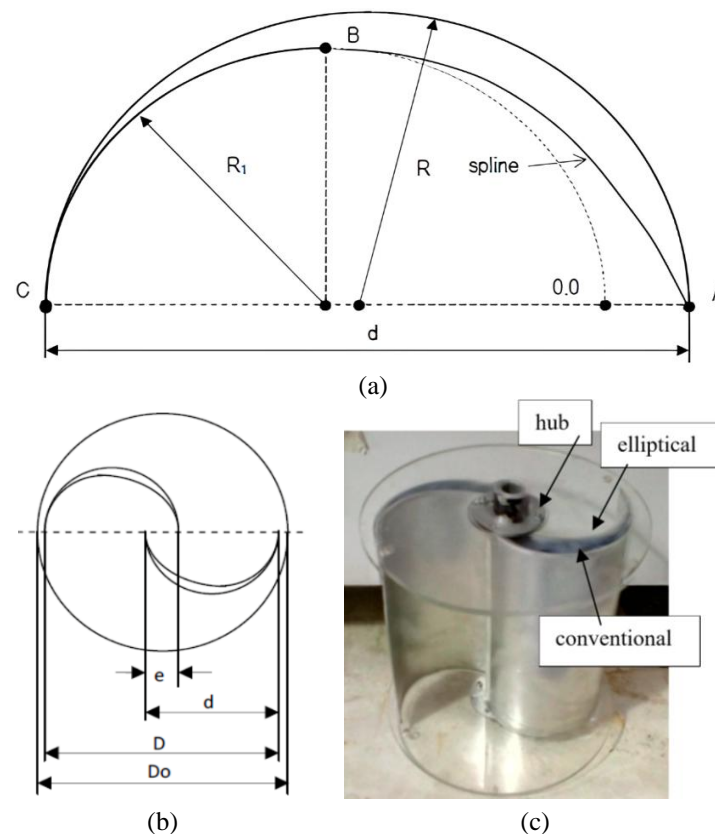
Blade combined: (a) coordinate points, (b) rotor dimensions, and (c) prototype rotor
